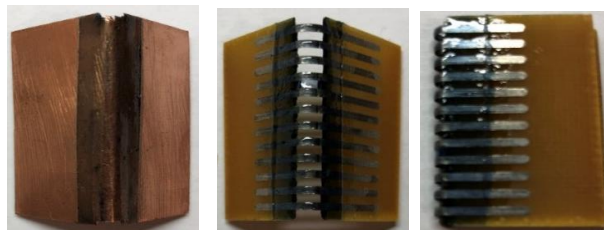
shows photographs of the PCB with polyimide layers applied to both sides.
